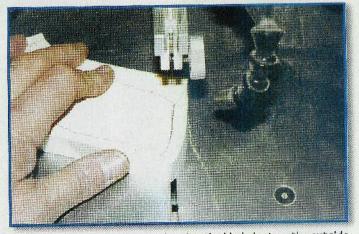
Cut the next piece out, keeping the blade just on the outside edge of the pencil line.
